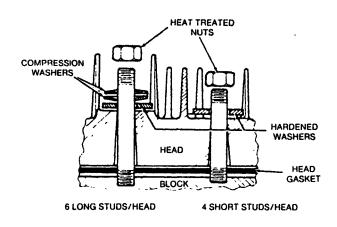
CYLINDER HEAD WITH COMPRESSION WASHERS
